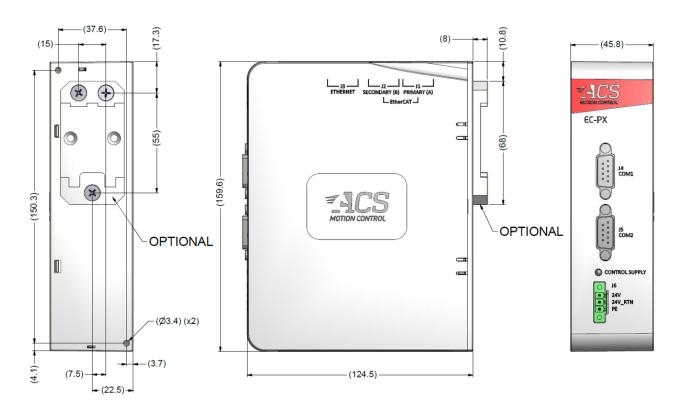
EC-PX Hardware Version A Dimensions: Side and Front Views
